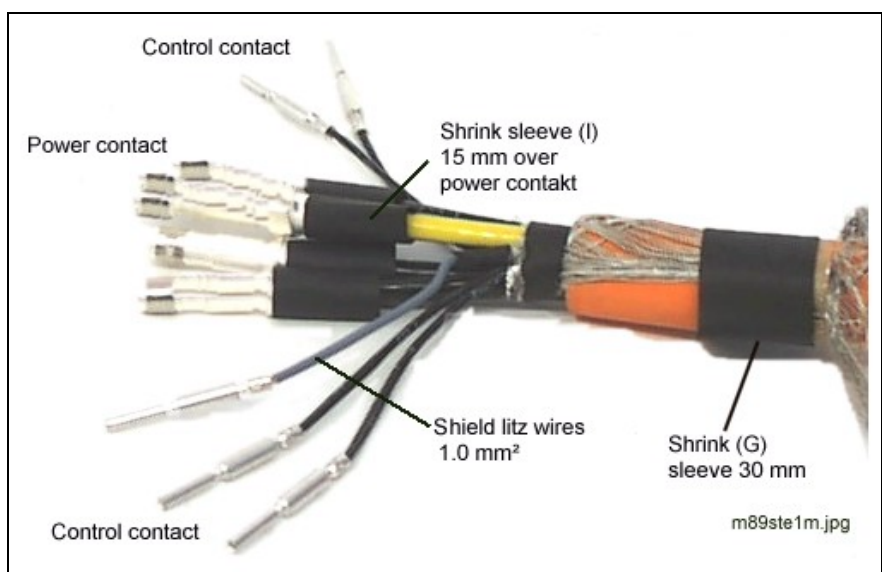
Making contacts for INS0481, -0482, -0486
